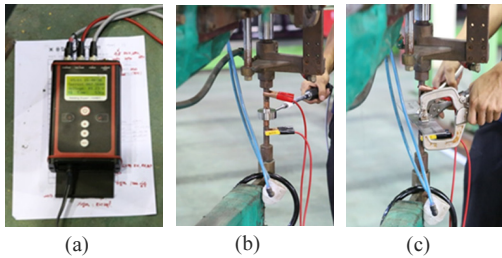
Pre-test for welding conditions (a) Calibration of the spot weld machine (b) Measuring applied force (c) Spot welding of SDDSS specimens
